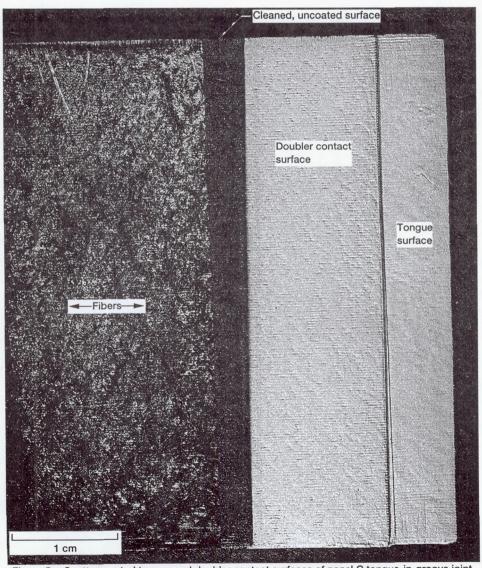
Sputter-coated tongue and doubler contact surfaces of panel C tongue-in-groove joint. Light area is coated with 2.8 µm of Ag.
